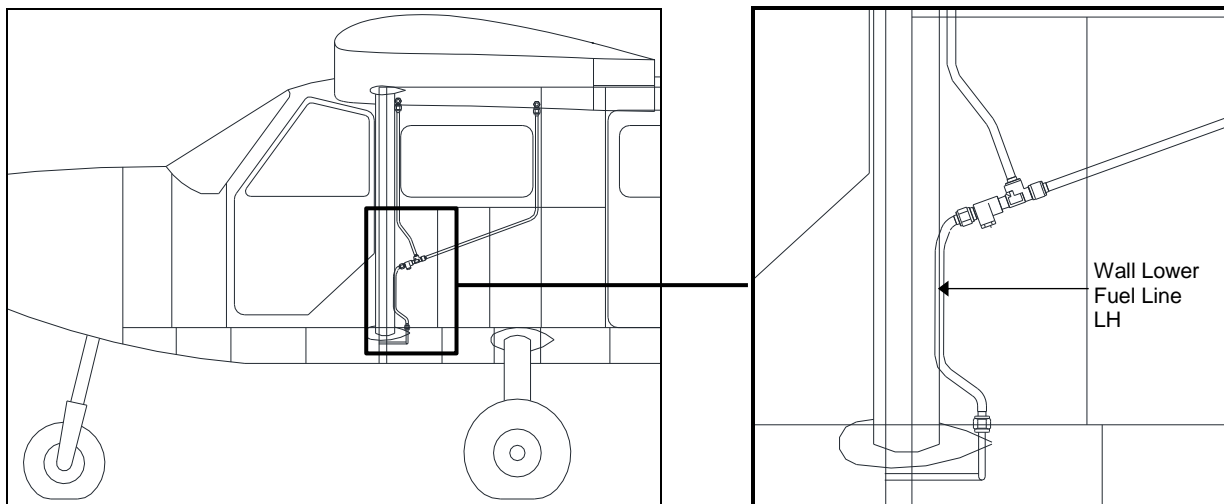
LH Wall Lower Fuel Line location (RH Wall similar)
